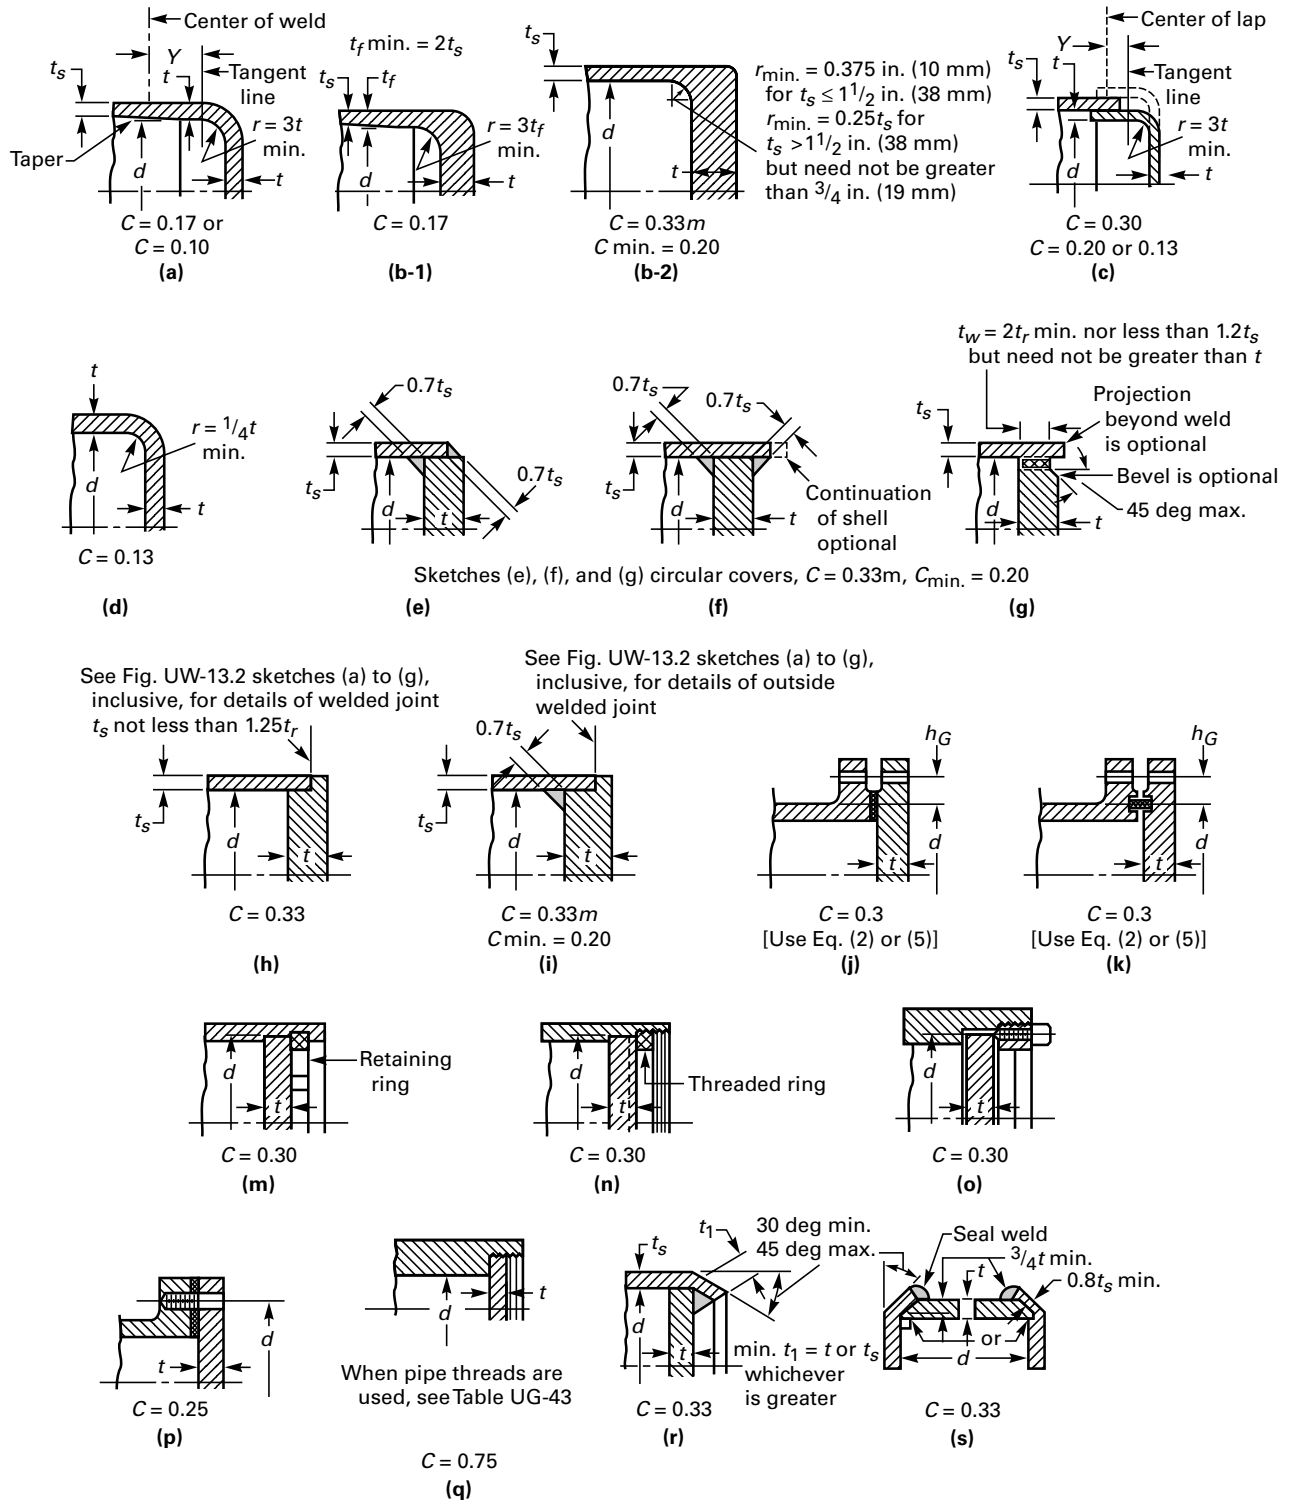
SOME ACCEPTABLE TYPES OF UNSTAYED FLAT HEADS AND COVERS
